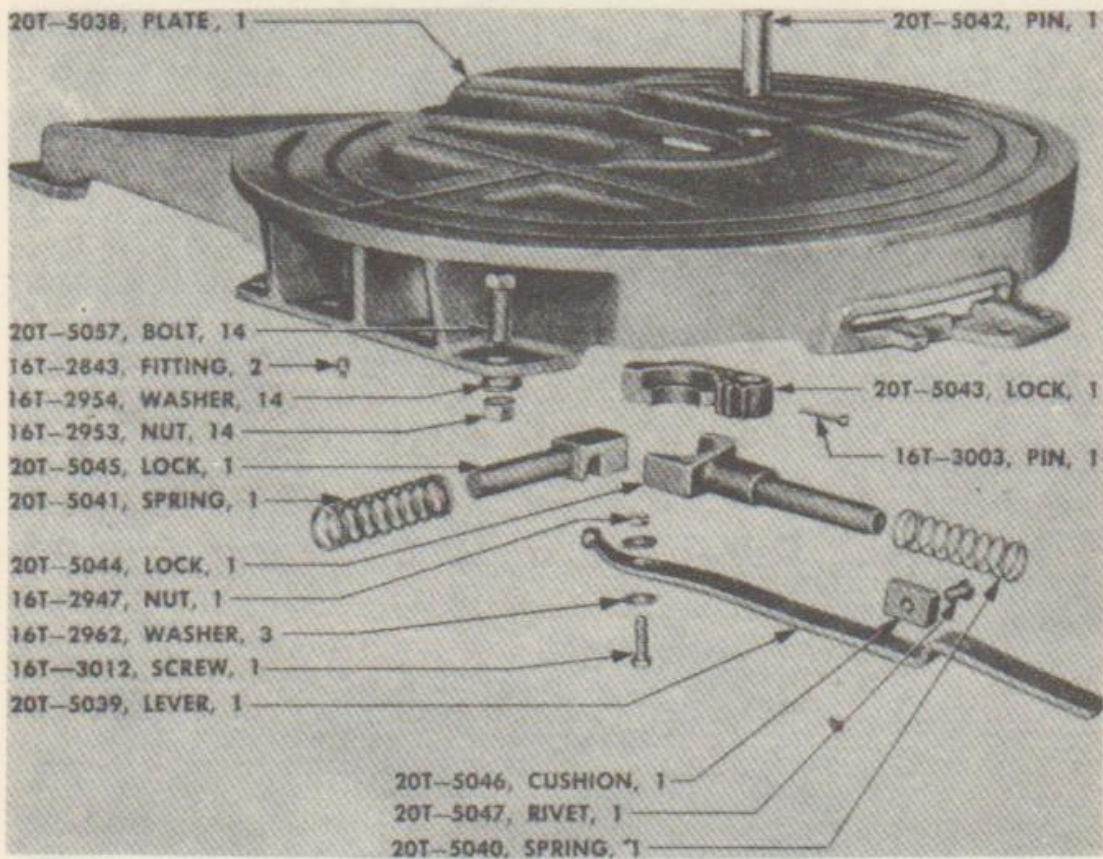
FIFTH WHEEL—EXPLODED VIEW
